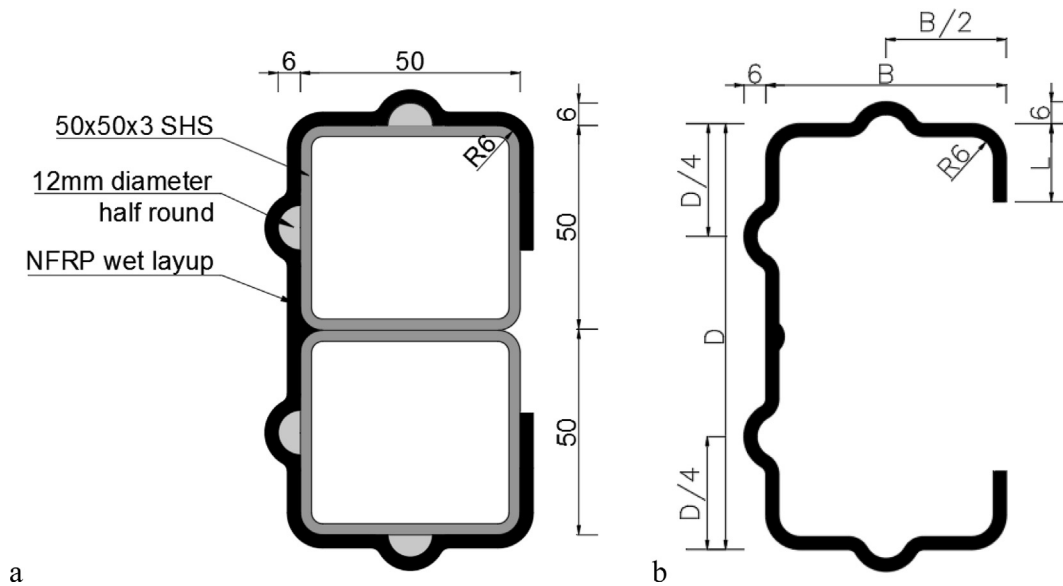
Channel fabrication; a) exemplar fabrication mandrel, b) resulting channel section (B , D , L are outside dimensions).
